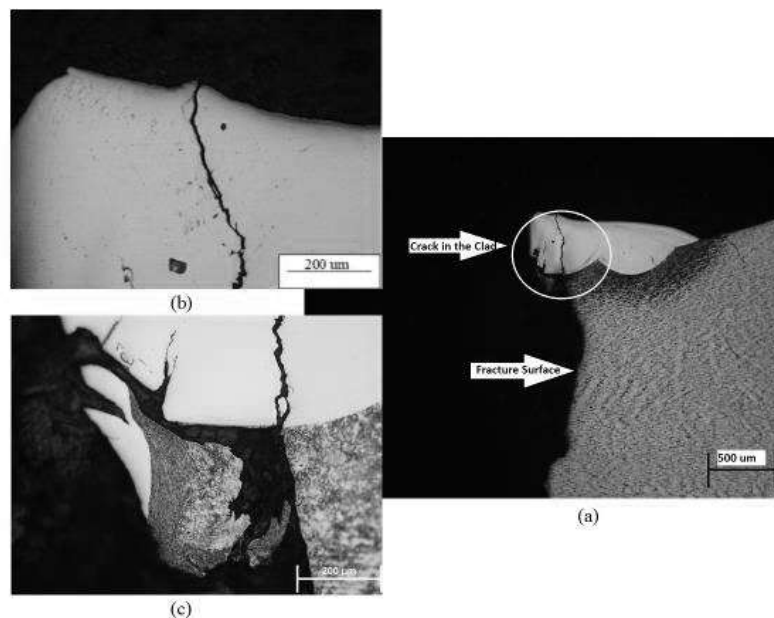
Section "d" of sample 15 (420 stainless steel clad ,Nf= 28,580) (a) the clad profile showing the crack along the clad layer linked to the fracture surface (b) the crack initiated from the surface of the clad (c) the crack reached the substrate and led to the premature failure of the sample
